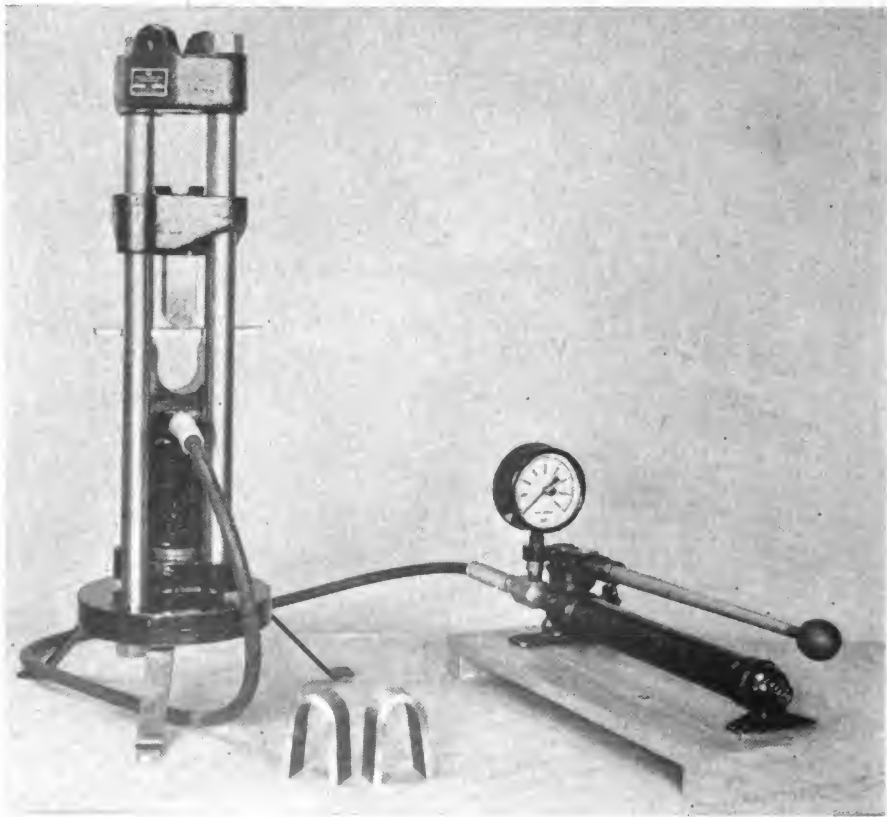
Keep the weld directly in the center of the bend.
